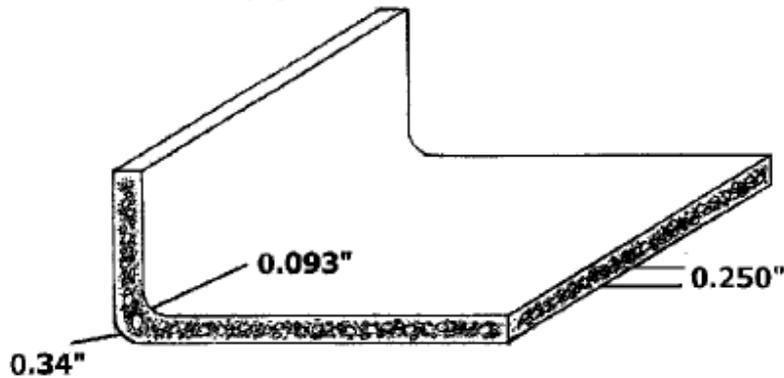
Low-pressure structural foam wall thickness and corner radius details.
